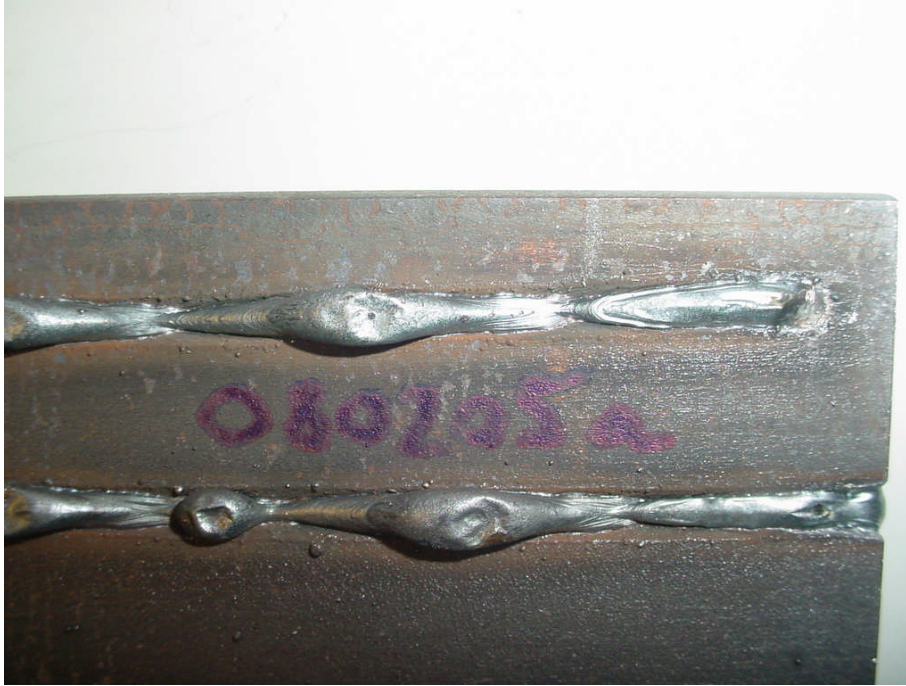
Plan View of GMAW-P BOP Humping (Upper Bead) and Weld Pool Cavity for Specimen 80205a WFS 15.2 m/min, TS 2.5 m/min, 225 A, 34 V, 19-mm CTWD, 5-mm Plate
